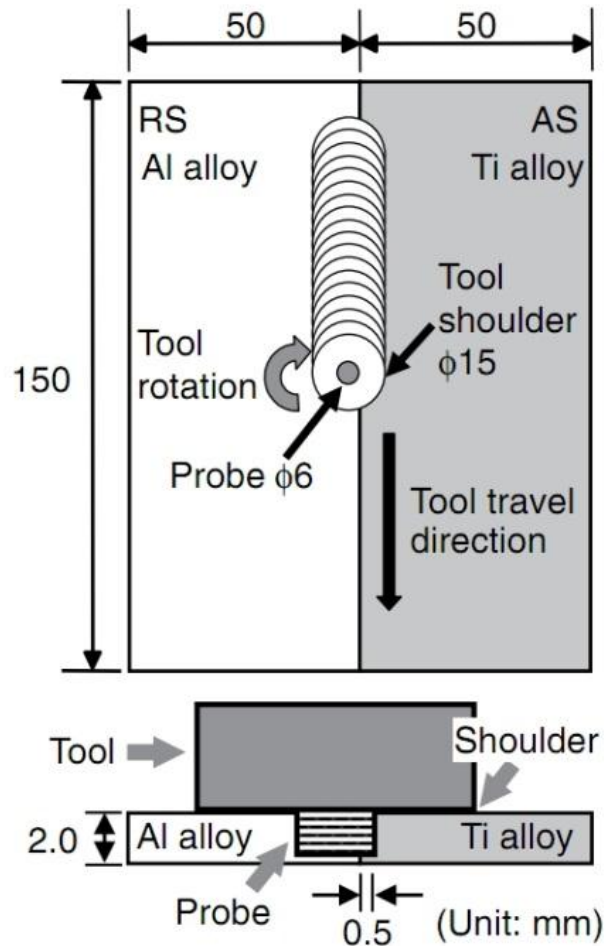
A schematic diagram of the friction stir butt welding process with tool probe shifting to Al side [13].
